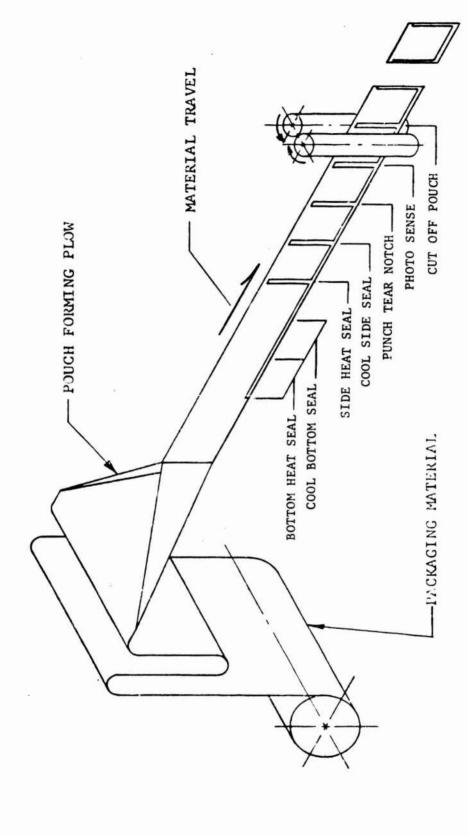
SCHEMATIC DRAWING OF POUCH MAKING.
